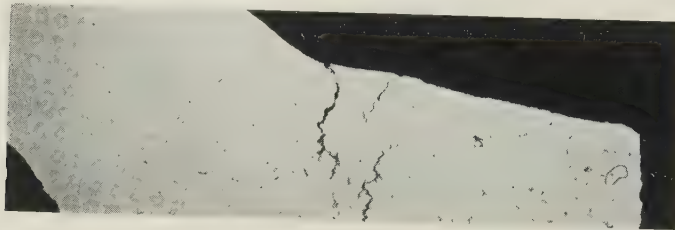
Microsection Through Crack from Casting Shown in Fig. D12.
